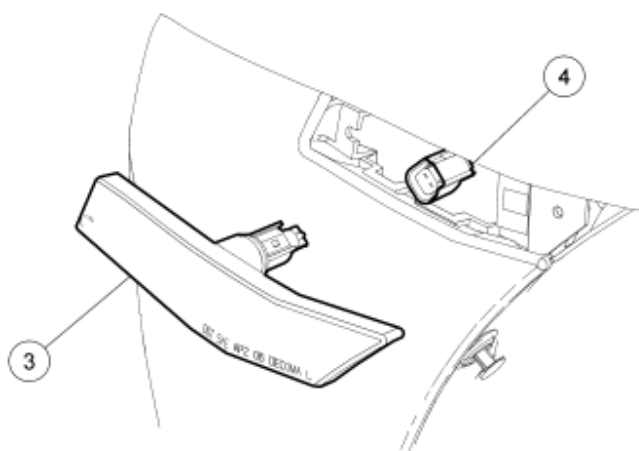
Exploded View Of Side Marker Lamp - All vehicles
